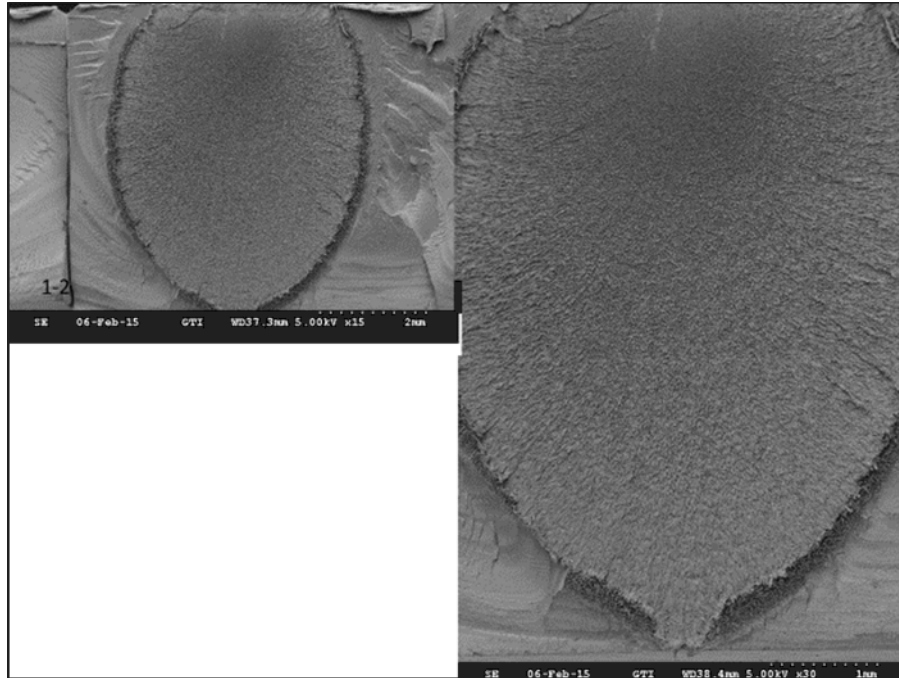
Fracture surface showing inner wall at top and outer wall at bottom
